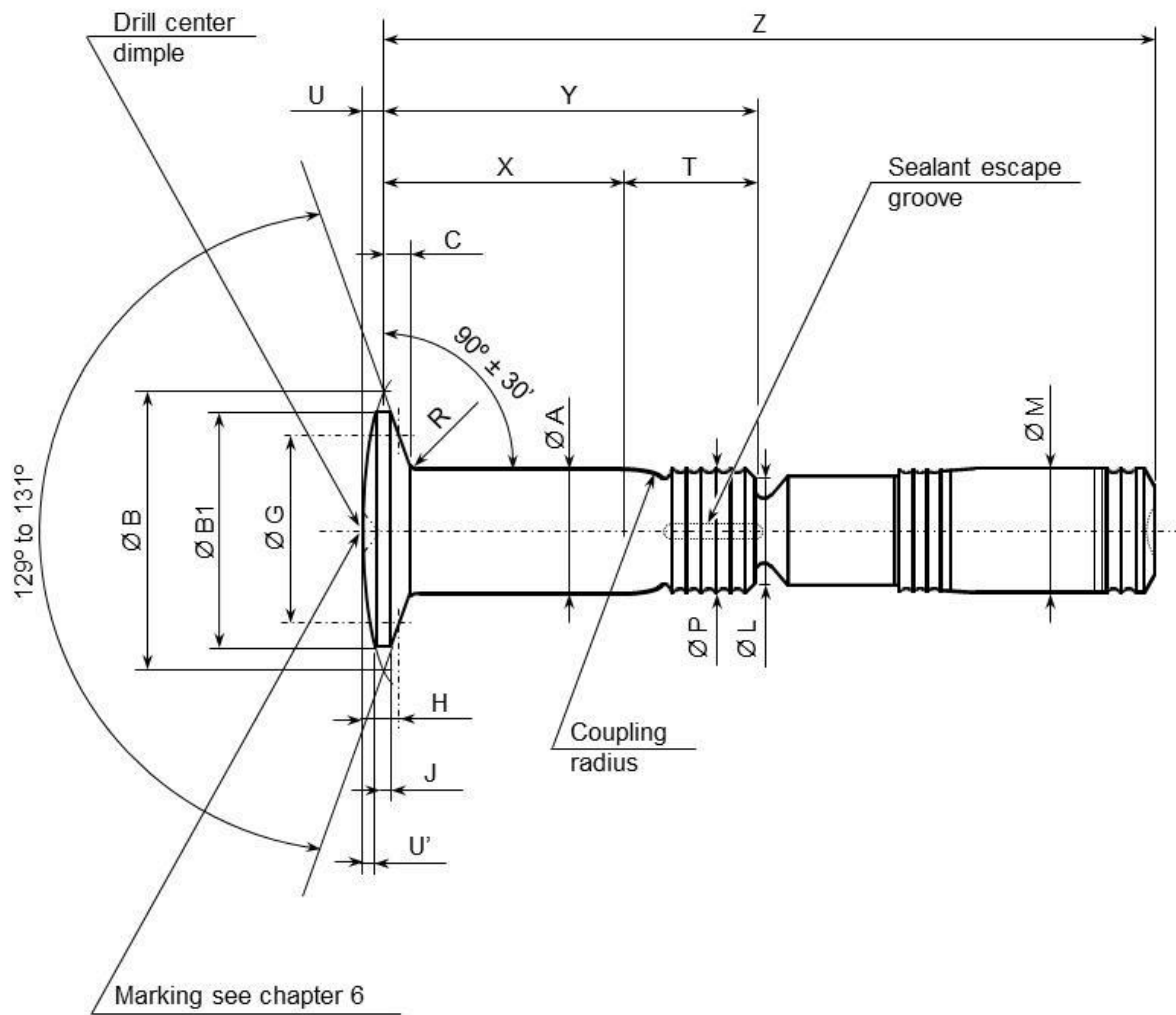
Configuration, dimensions, tolerances (Style “–”)
